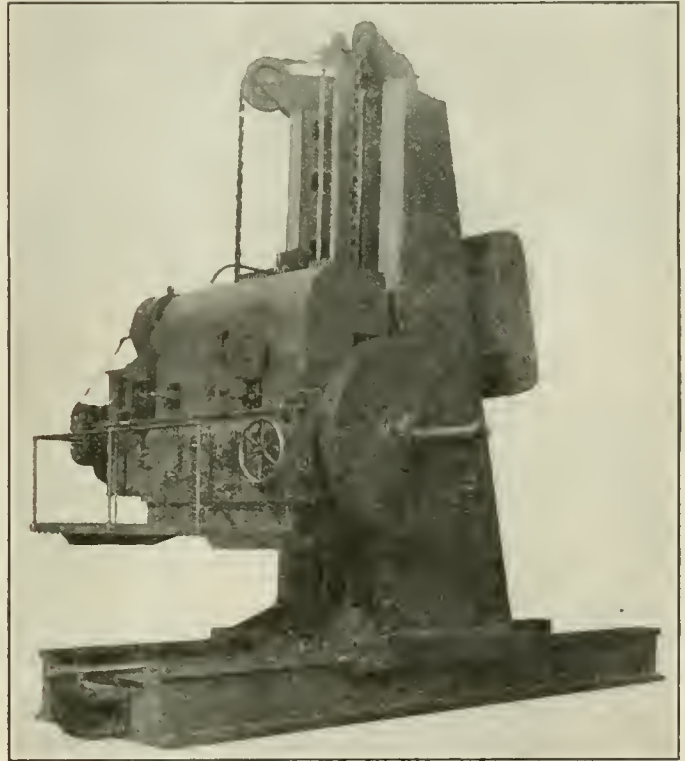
FLOOR BORING, DRILLING, AND MILLING MACHINE
